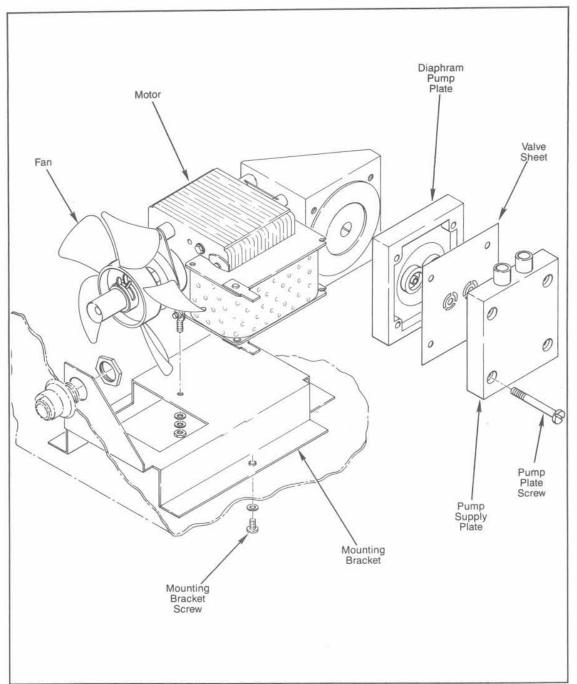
LOCATION OF MOTOR/PUMP ASSEMBLY (PCG-620 ONLY)
